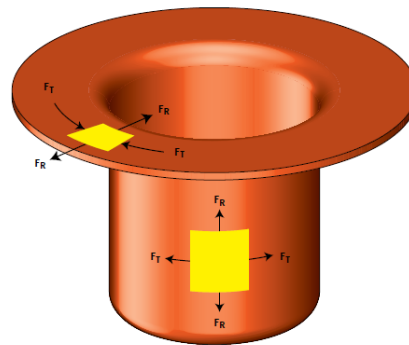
The representation of pressing forces in deep drawing of a round cup with a blank holder, [44].
